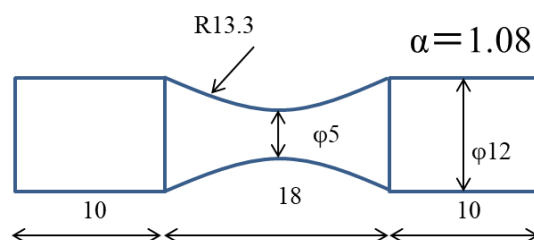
Shape of torsional fatigue test specimen, dimensions in mm.
